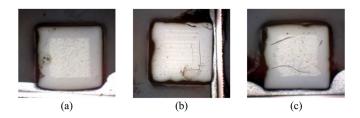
Cross-sections of three 0603 capacitors with 100 nF nominal capacitance produced. (a) Manufacturer A. (b) Manufacturer B. (c) Manufacturer C.
